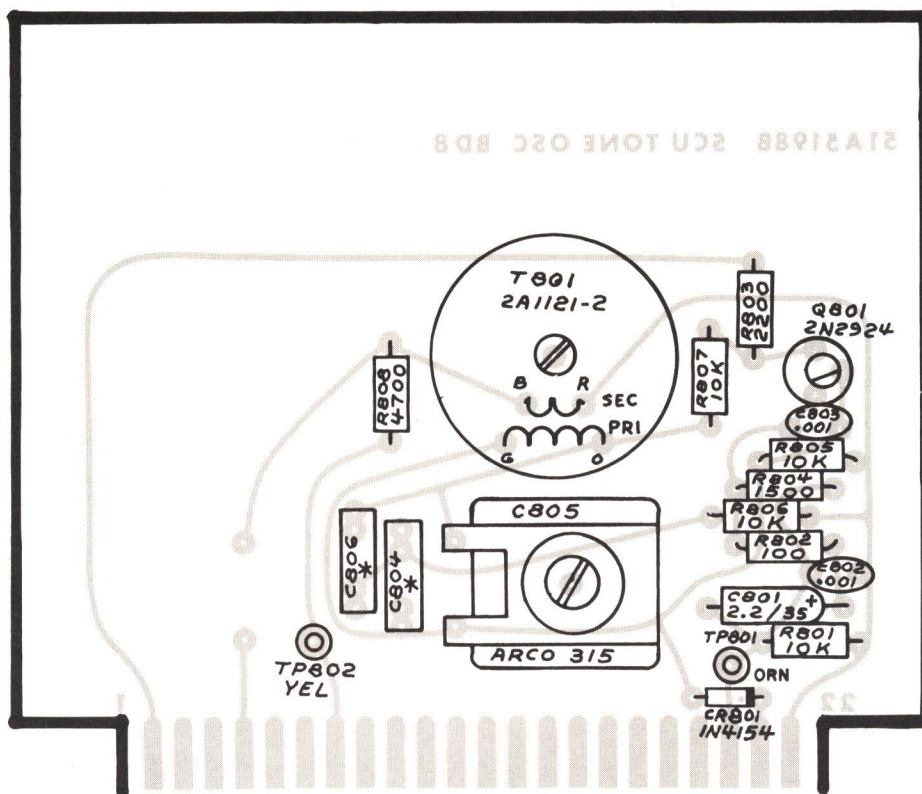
SCU Tone Oscillator (Board 8), Parts Location
